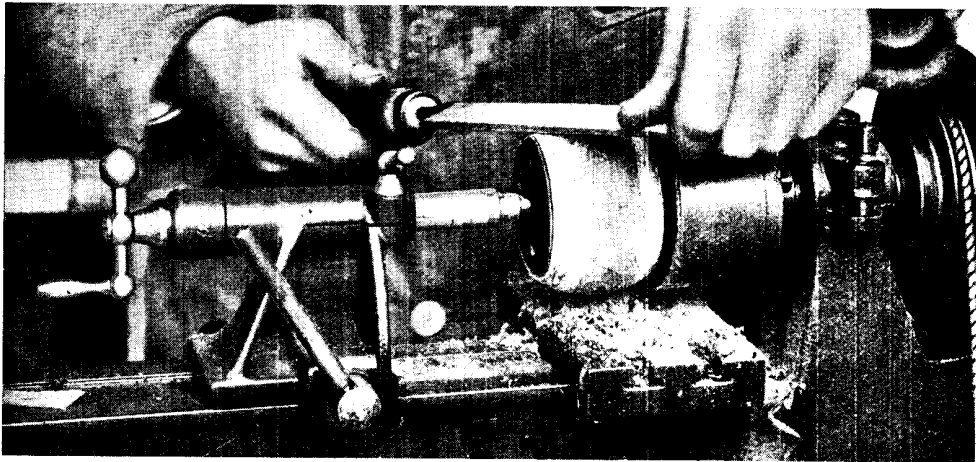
Rotated on a lathe is the roughly-shaped rotor in Fig. 6, and a wood-turning gouge is being applied to make the desired shape
